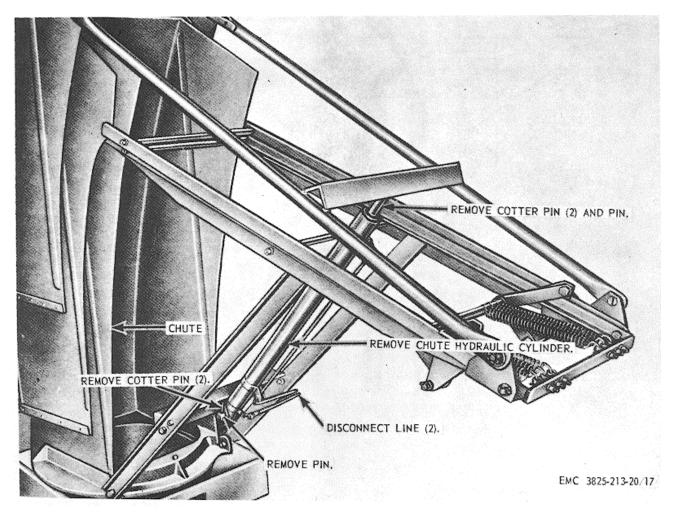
Chute hydraulic lifting cylinder assembly, removal and installation.
